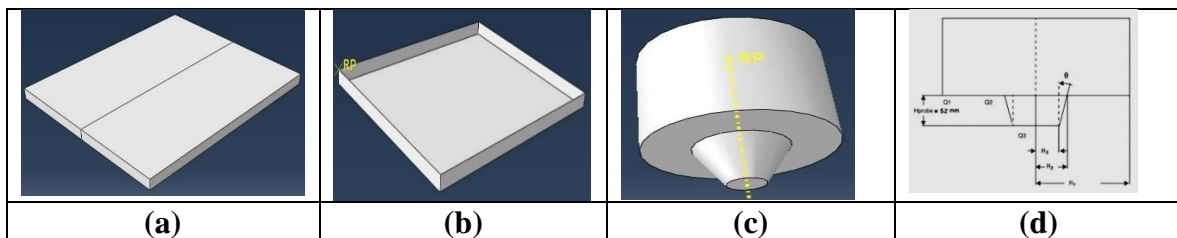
SPH parts: a) Work piece; b) Die; c) PCBN tool; d) Tool Geometry, [17].
